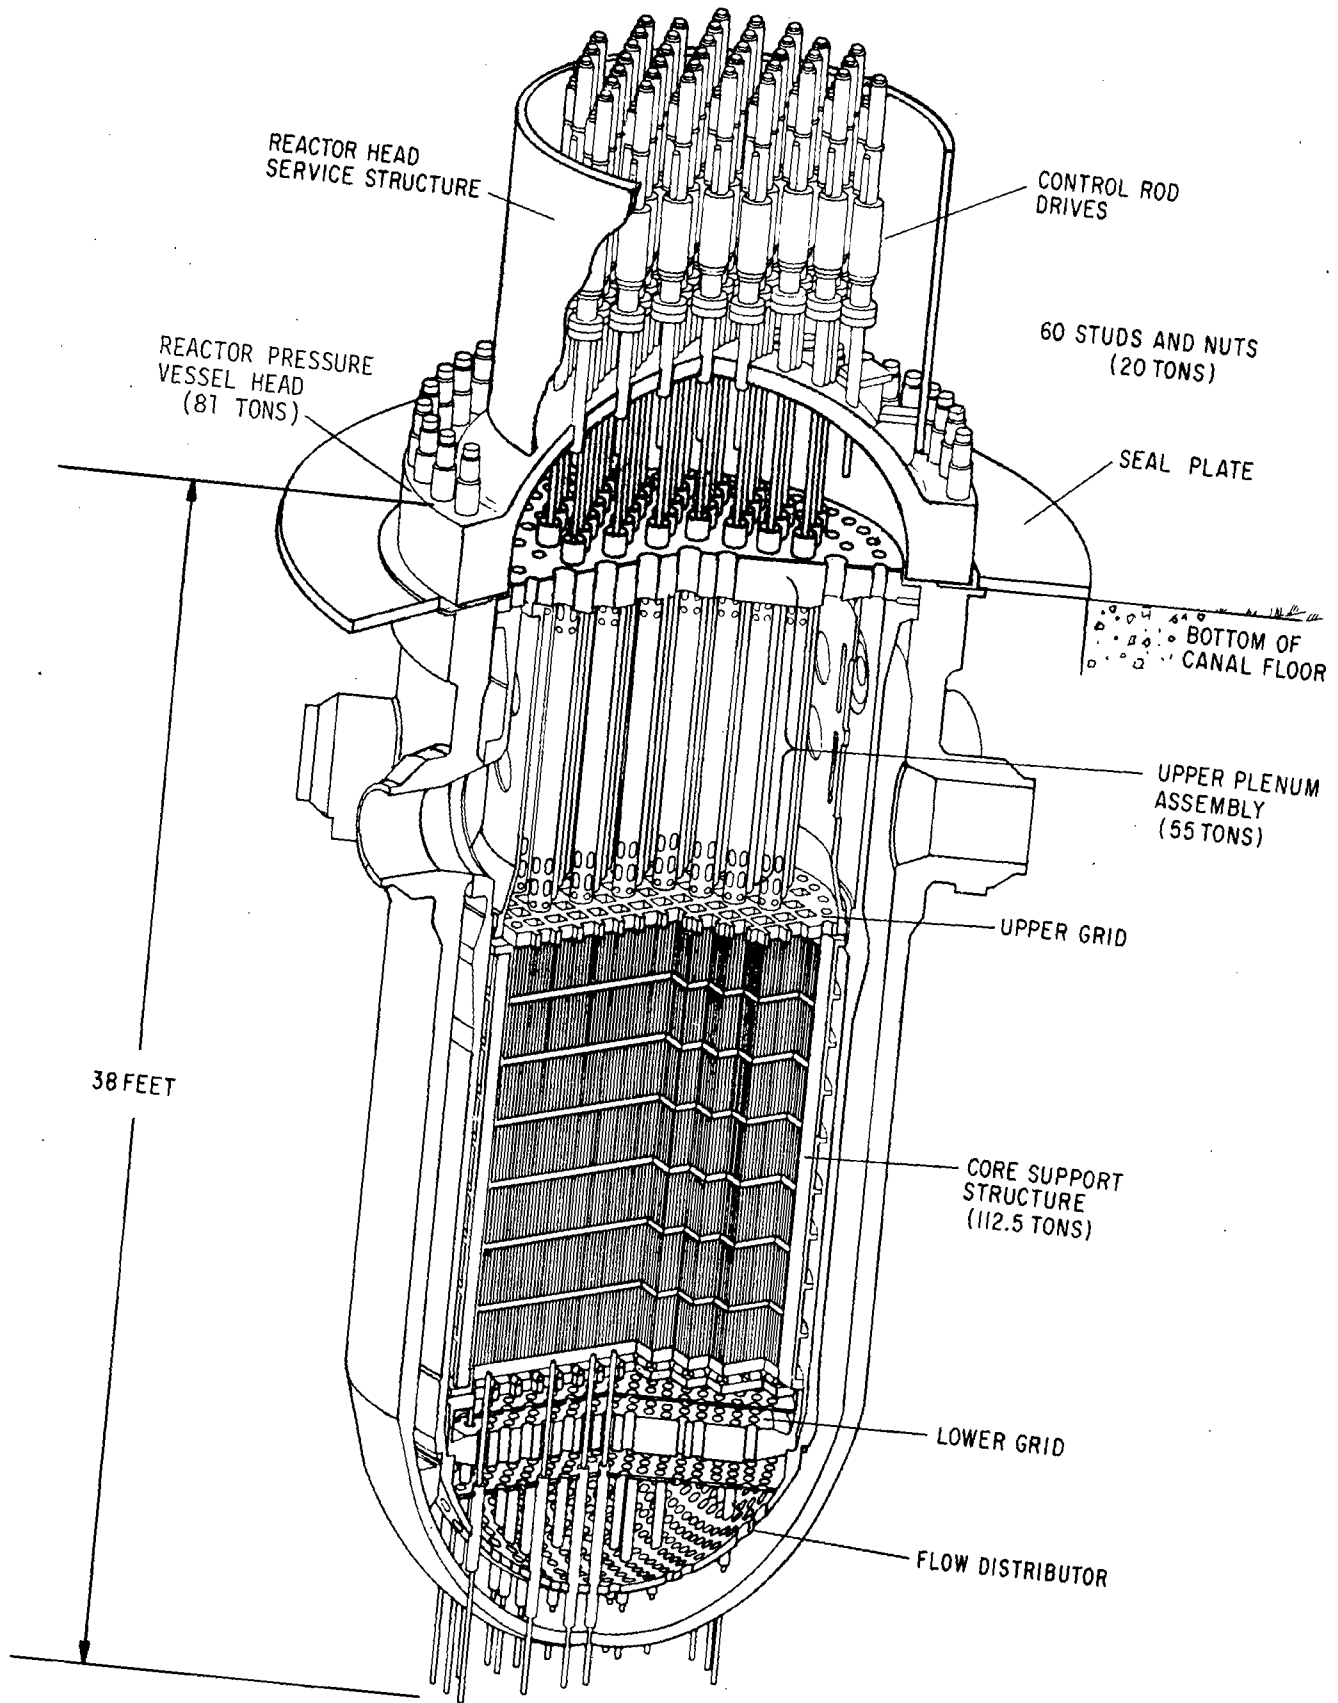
Cutaway View of a Typical PWR Similar to the TMI-2 Reactor Pressure Vessel.
